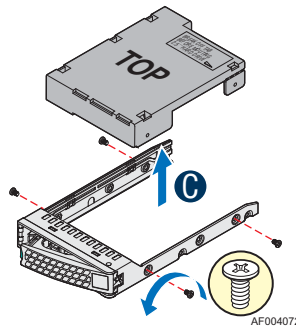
3.5" HDD Assembly – Removing the Drive Blank
